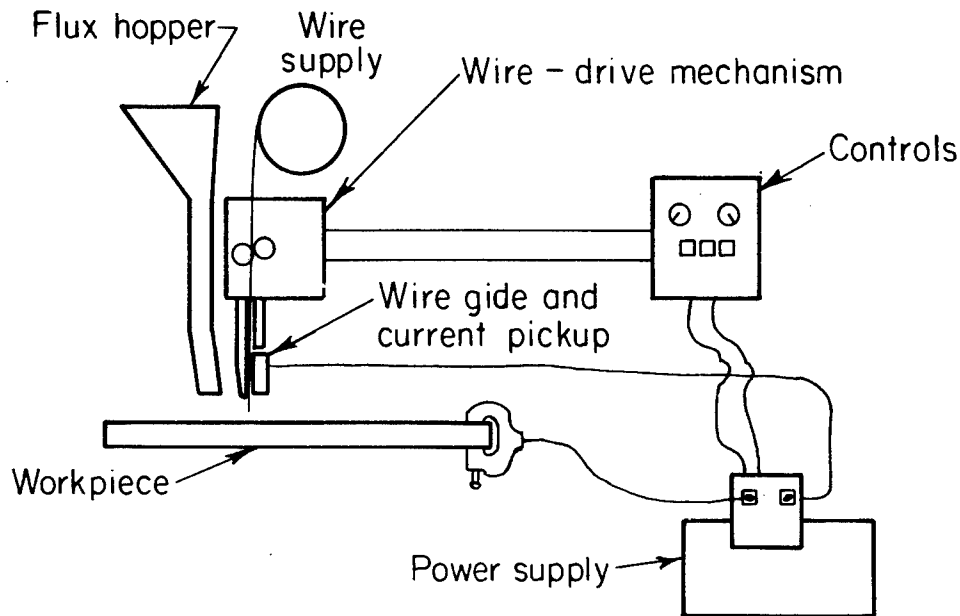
AUTOMATIC SUBMERGED-ARC WELDING EQUIPMENT AND CONTROLS FOR AUTOMATIC WELDING IN THE FLAT POSITION
